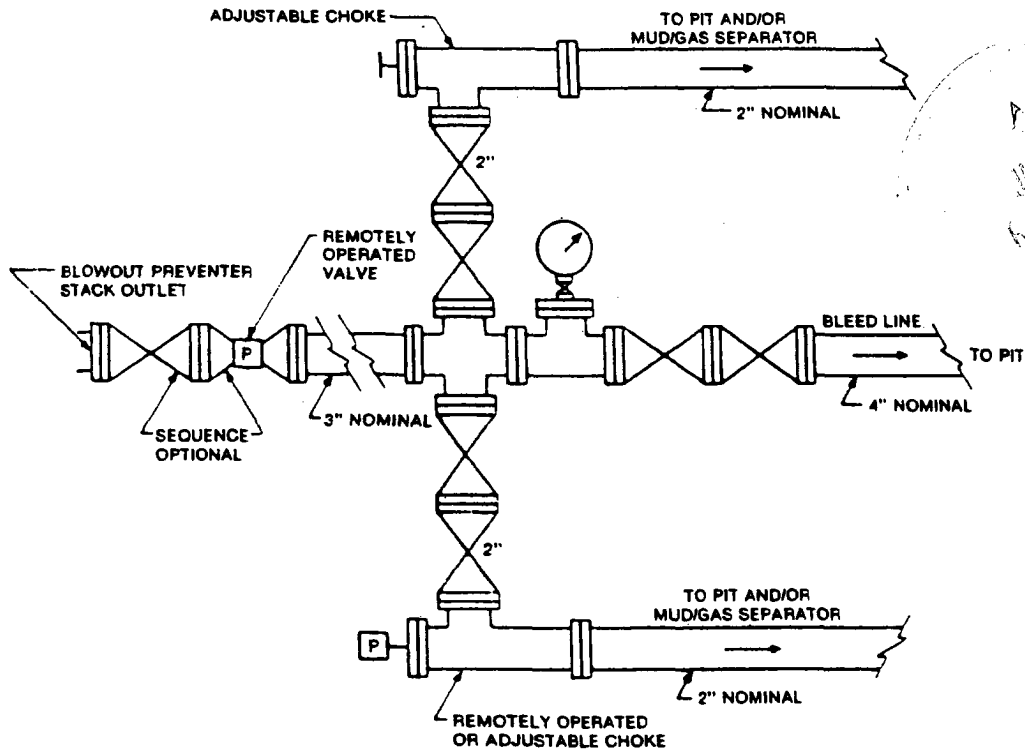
Typical choke manifold assembly for 5M rated working pressure service — surface installation.
